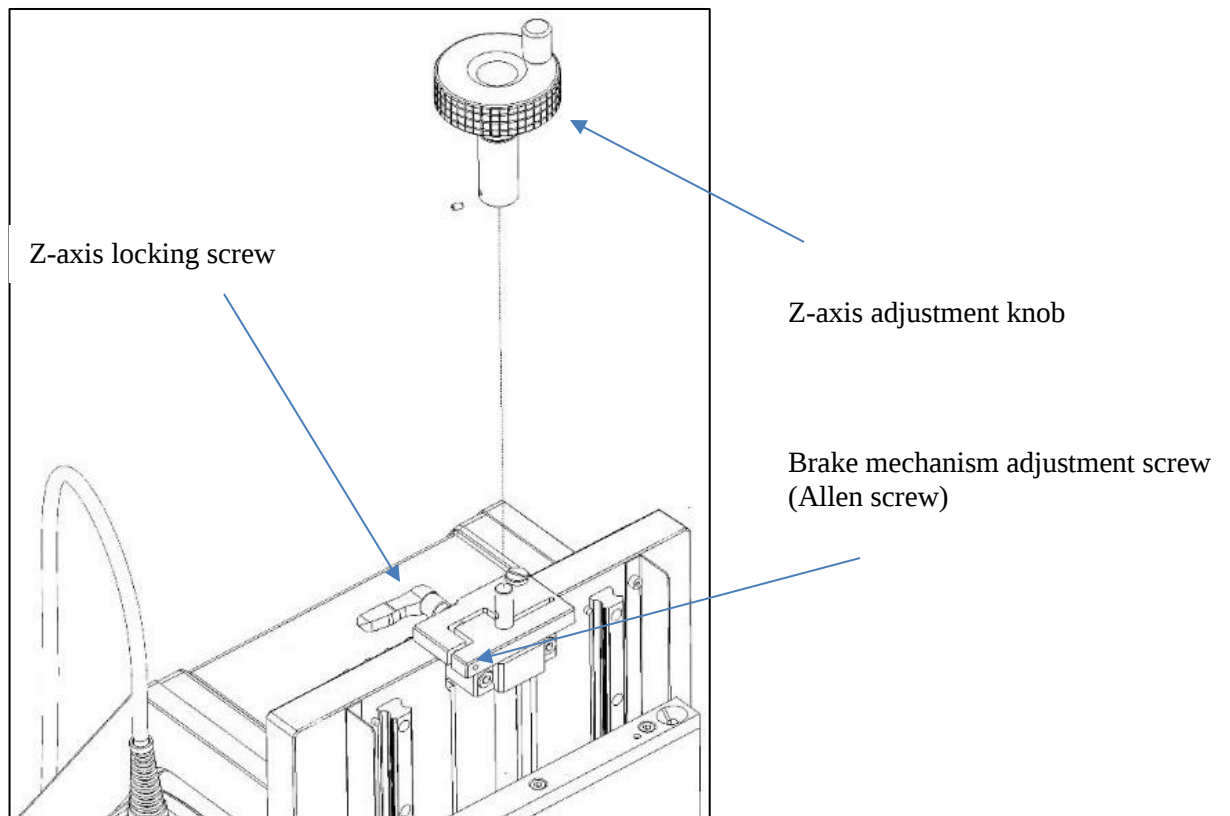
Fastening the Z-axis Adjustment Knob (with Z-axis locking screw)
